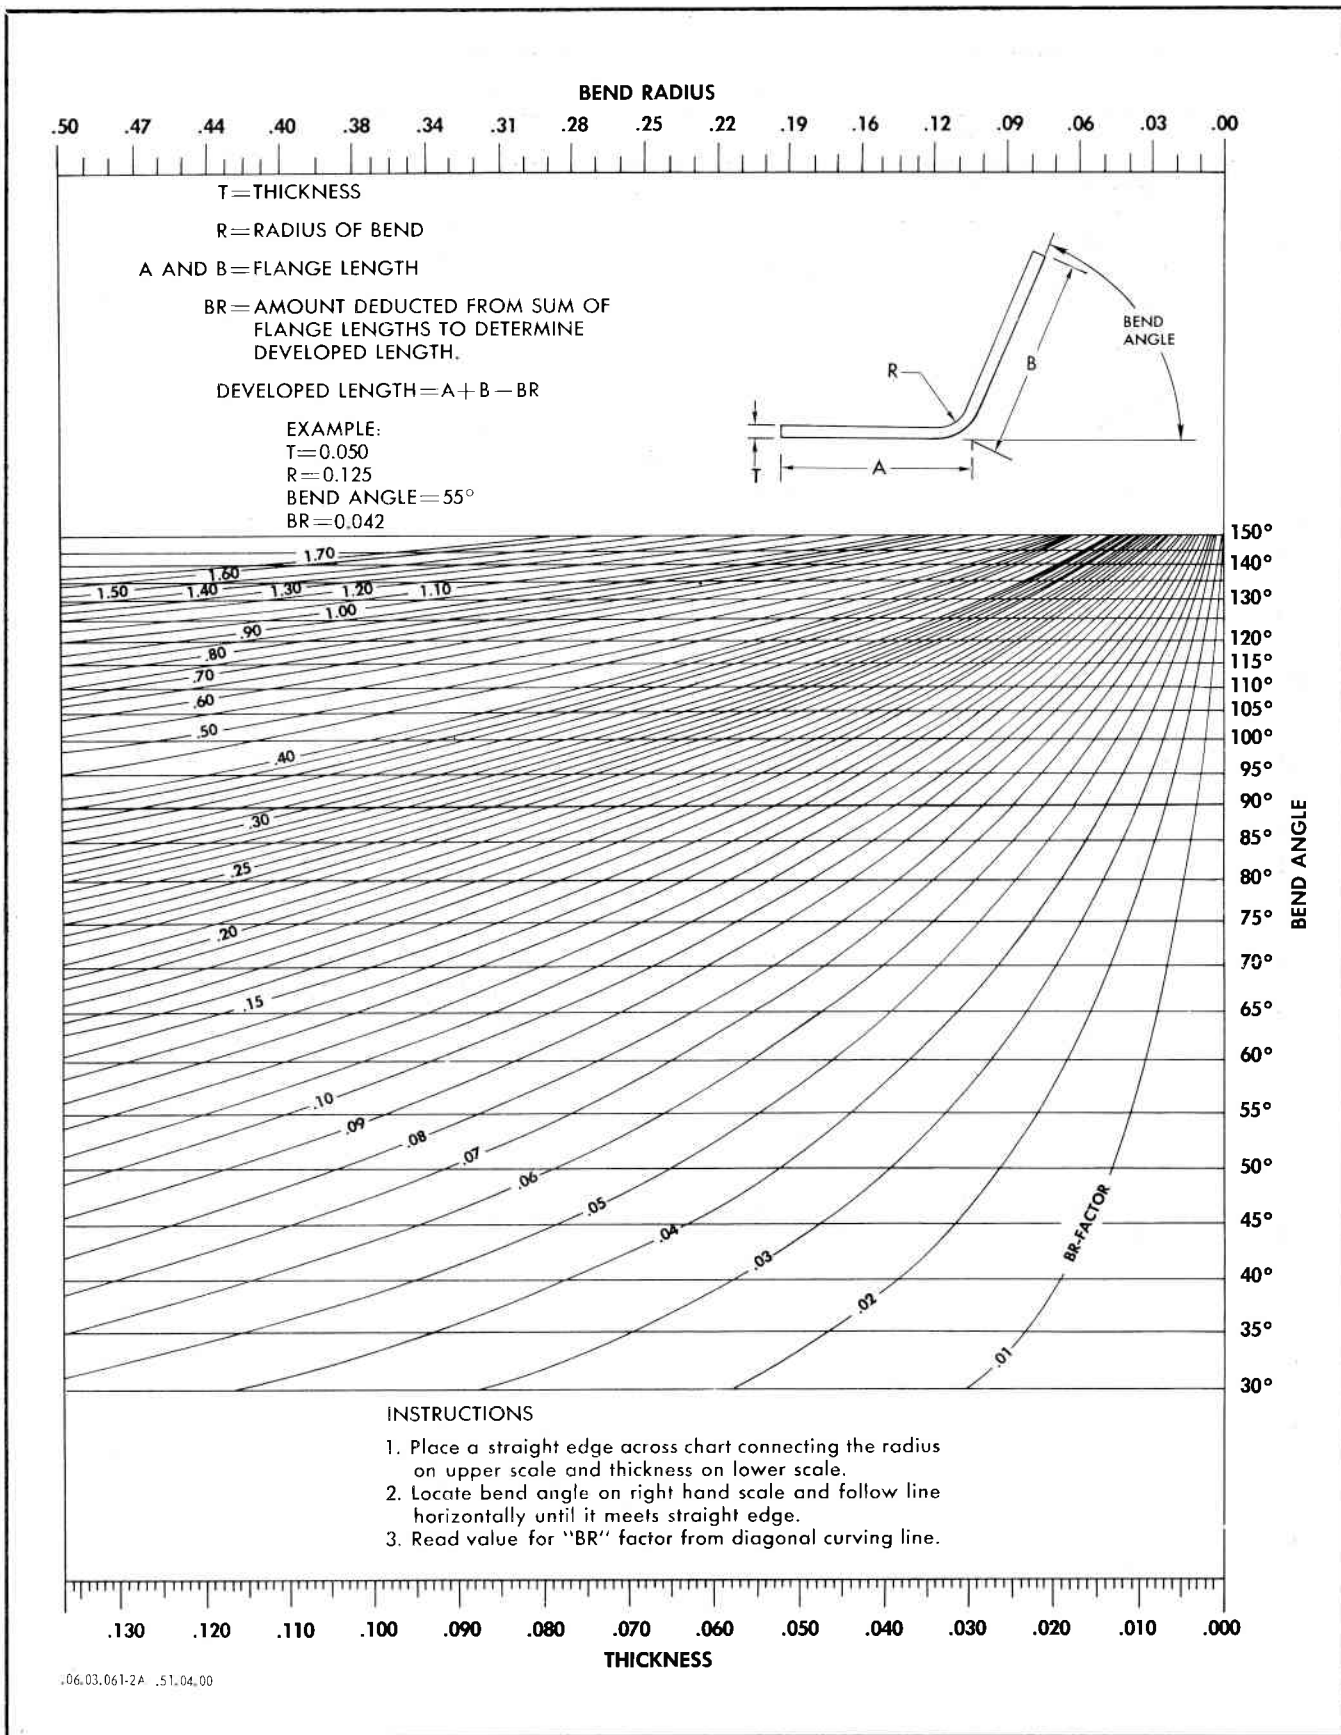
Flat Pattern Layout (Sheet 2 of 3)
